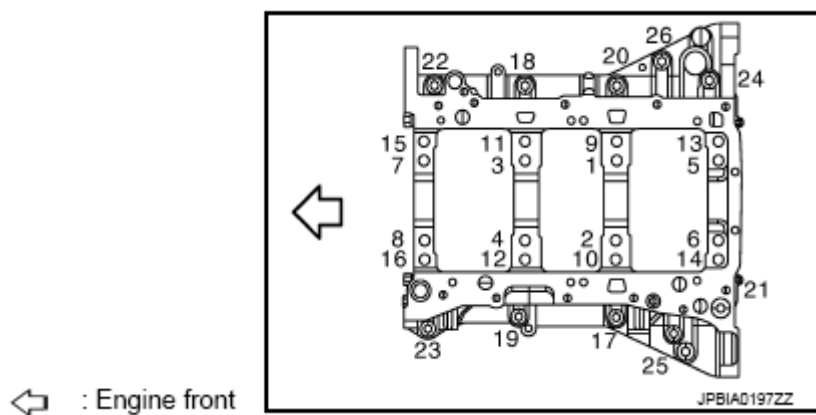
Locating Lower Cylinder Block Bolts With Tightening Sequence
